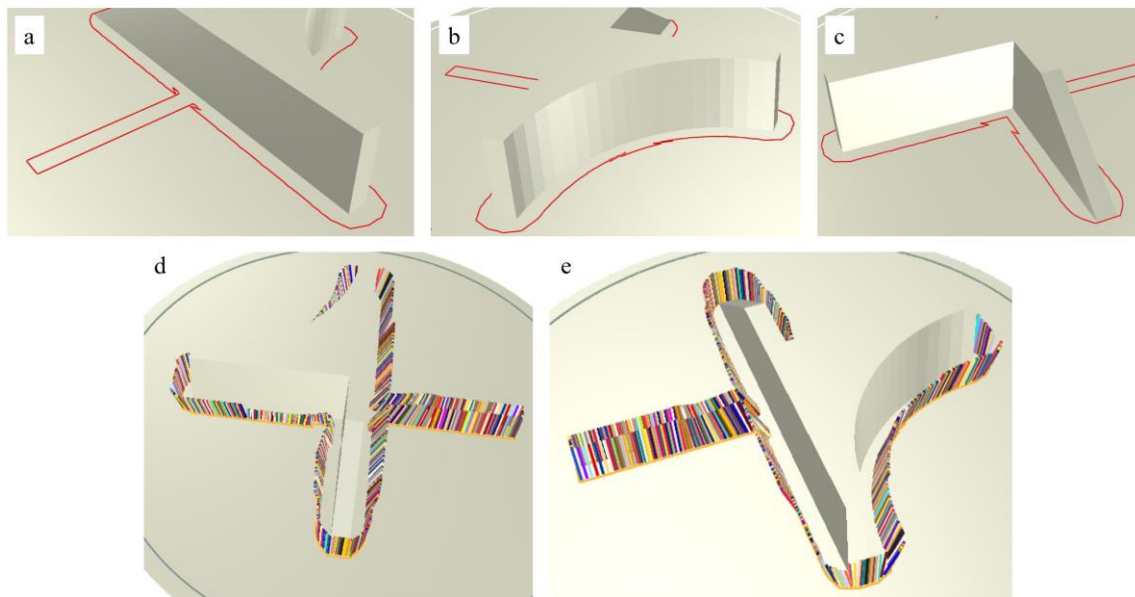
The test surface showing the print surface (tan) and the single-layer area to print (red).
